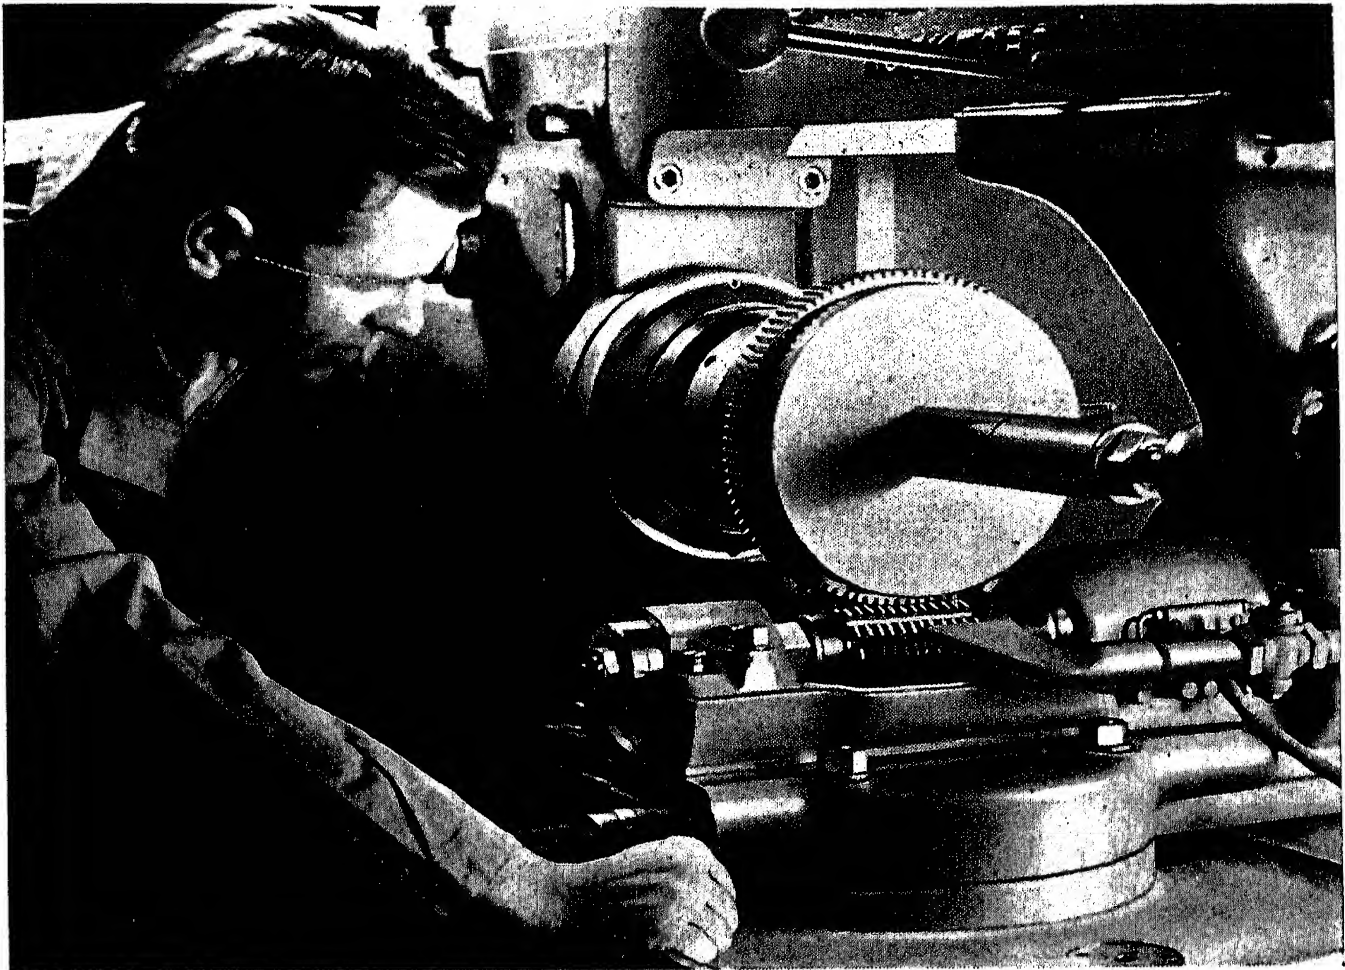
A gear being hobbed on a hobbing machine. (Courtesy Barber Colman Co.)
